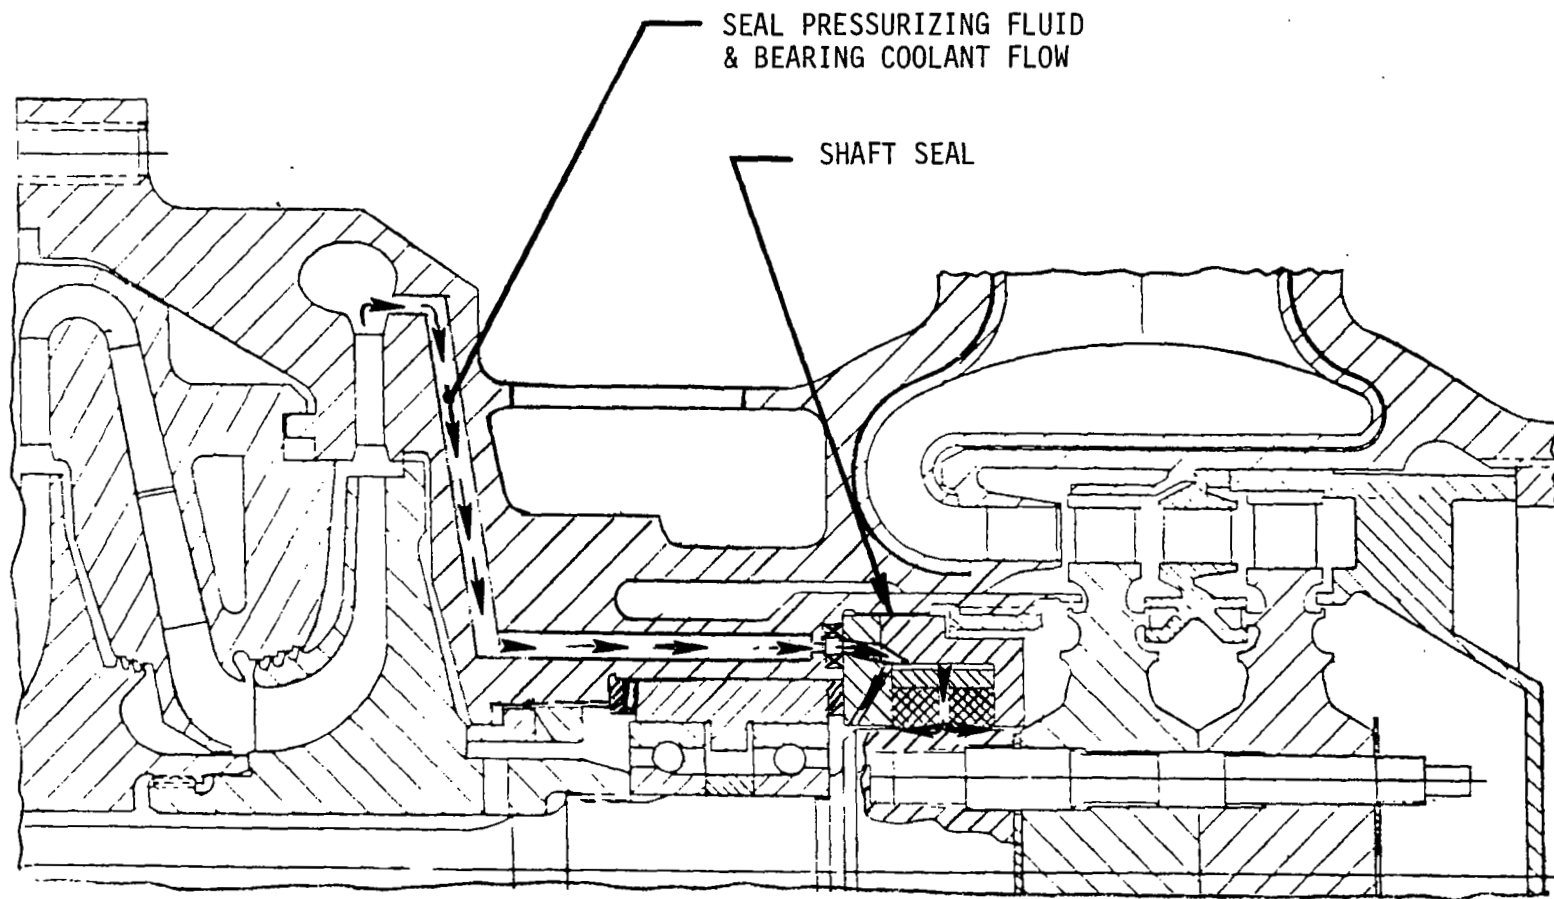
Mark 48-F Turbopump Shaft Seal Configuration
